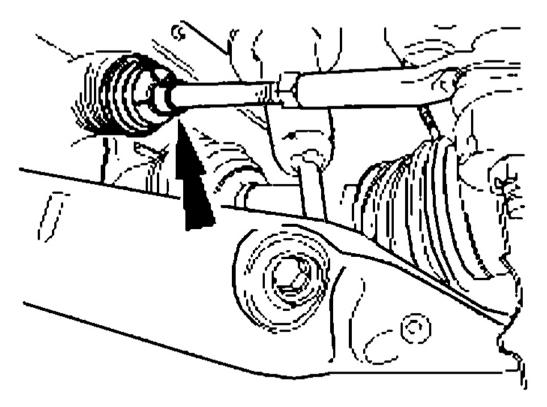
Removing Clamps Courtesy of FORD MOTOR CO.
